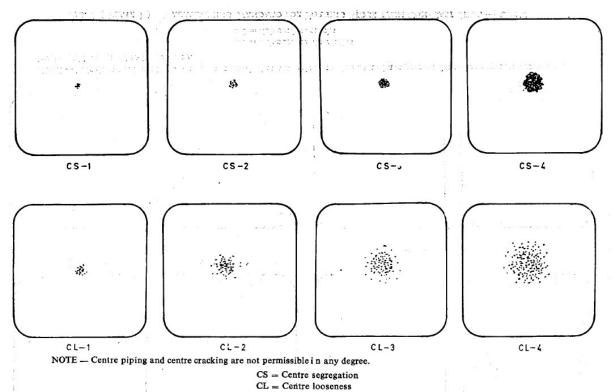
(Plate 2) Macroetching Standard for Forging Stock from Con-Cast Steel
